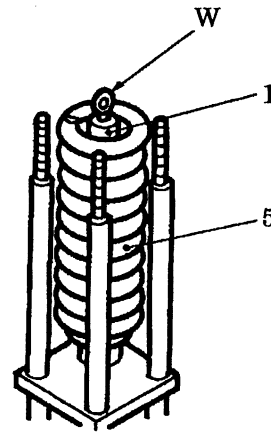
Placing spring (8) and grease cylinder (1) to the jig
